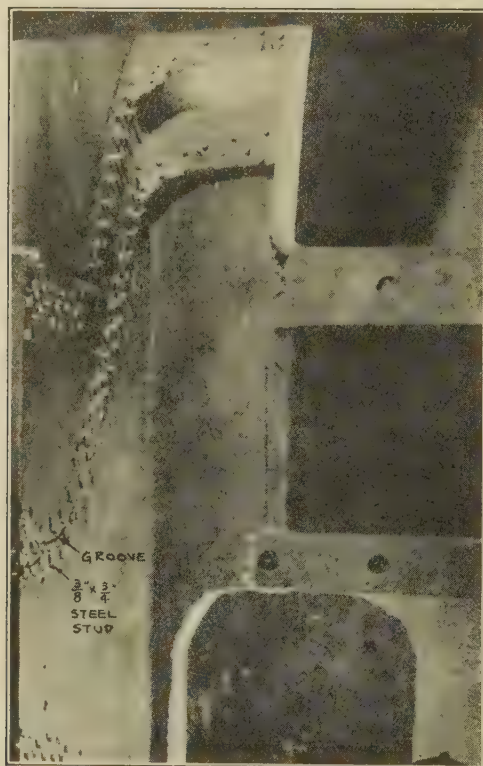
Cast-iron high-pressure cylinder of S.S. *Rondo* showing studding preparatory to welding.
